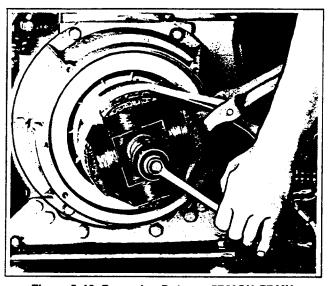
Removing Rotor — 5RMOY, 7RMY, 7.5C & 7.5R
